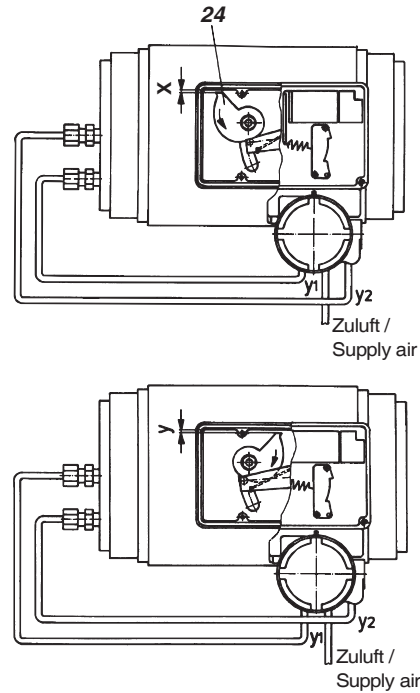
Rotary actuator with attachment kit for rotary movement and double-acting positioner
